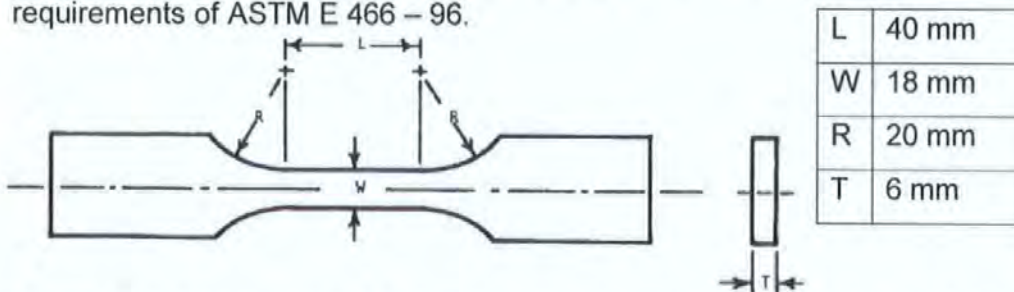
Dimension of fatigue specimen according to ASTM E 466-96<sup>1</sup>.
